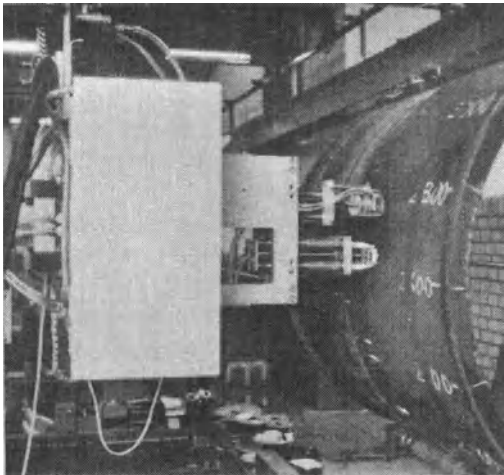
Test installation for welds in thick-walled pressure vessels Type BPA (design Krautkrämer)
